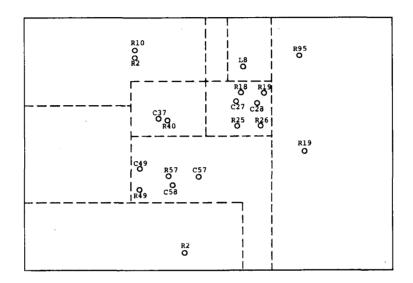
RF/CAL Printed Circuit Board shield cover
